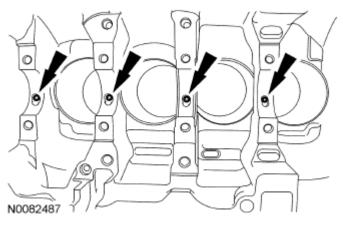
Locating Oil Squirters Courtesy of FORD MOTOR CO.
